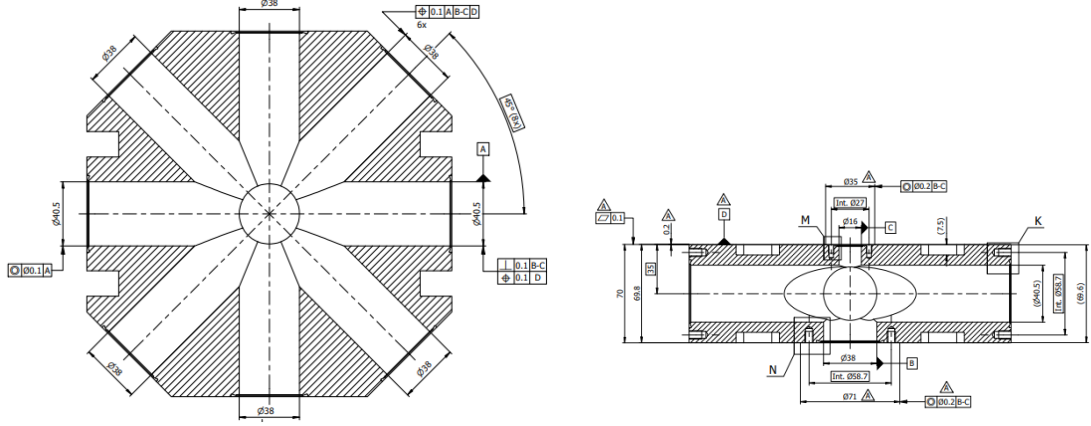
Mechanical drawings of the 2D-MOT chamber provided by *SAES Vacuum Technology*. On the left a view on a cross section of the octagon with all drillings for the oven and laser beams. On the right a side view with the flange connections for the pumping stage as well as the differential pumping stage and the extrusions for the permanent magnets.
